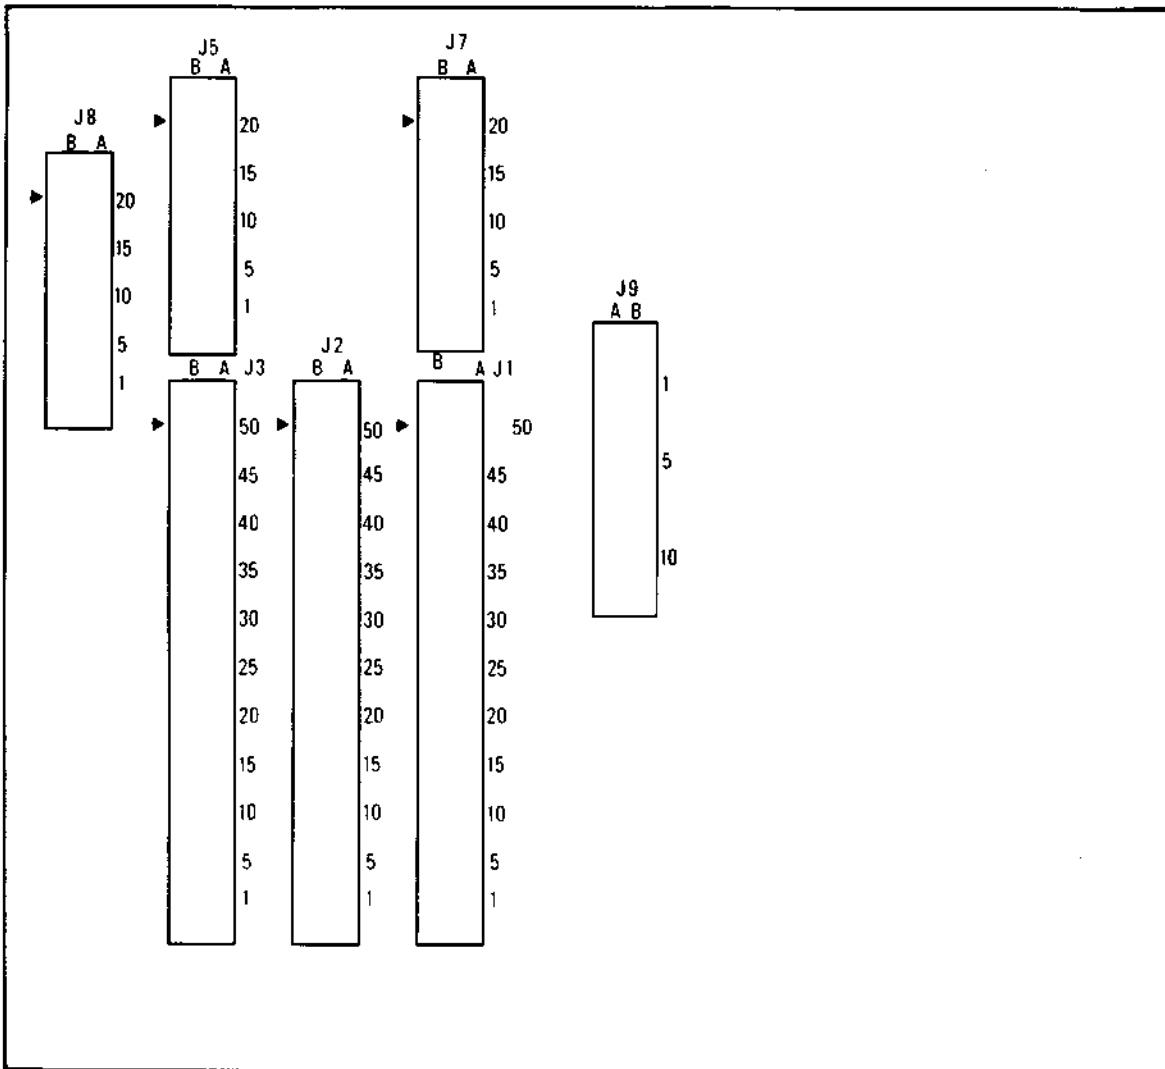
(2/2) A11 COMMON BOARD PC-Board Parts Layout (Pattern Side) 38
